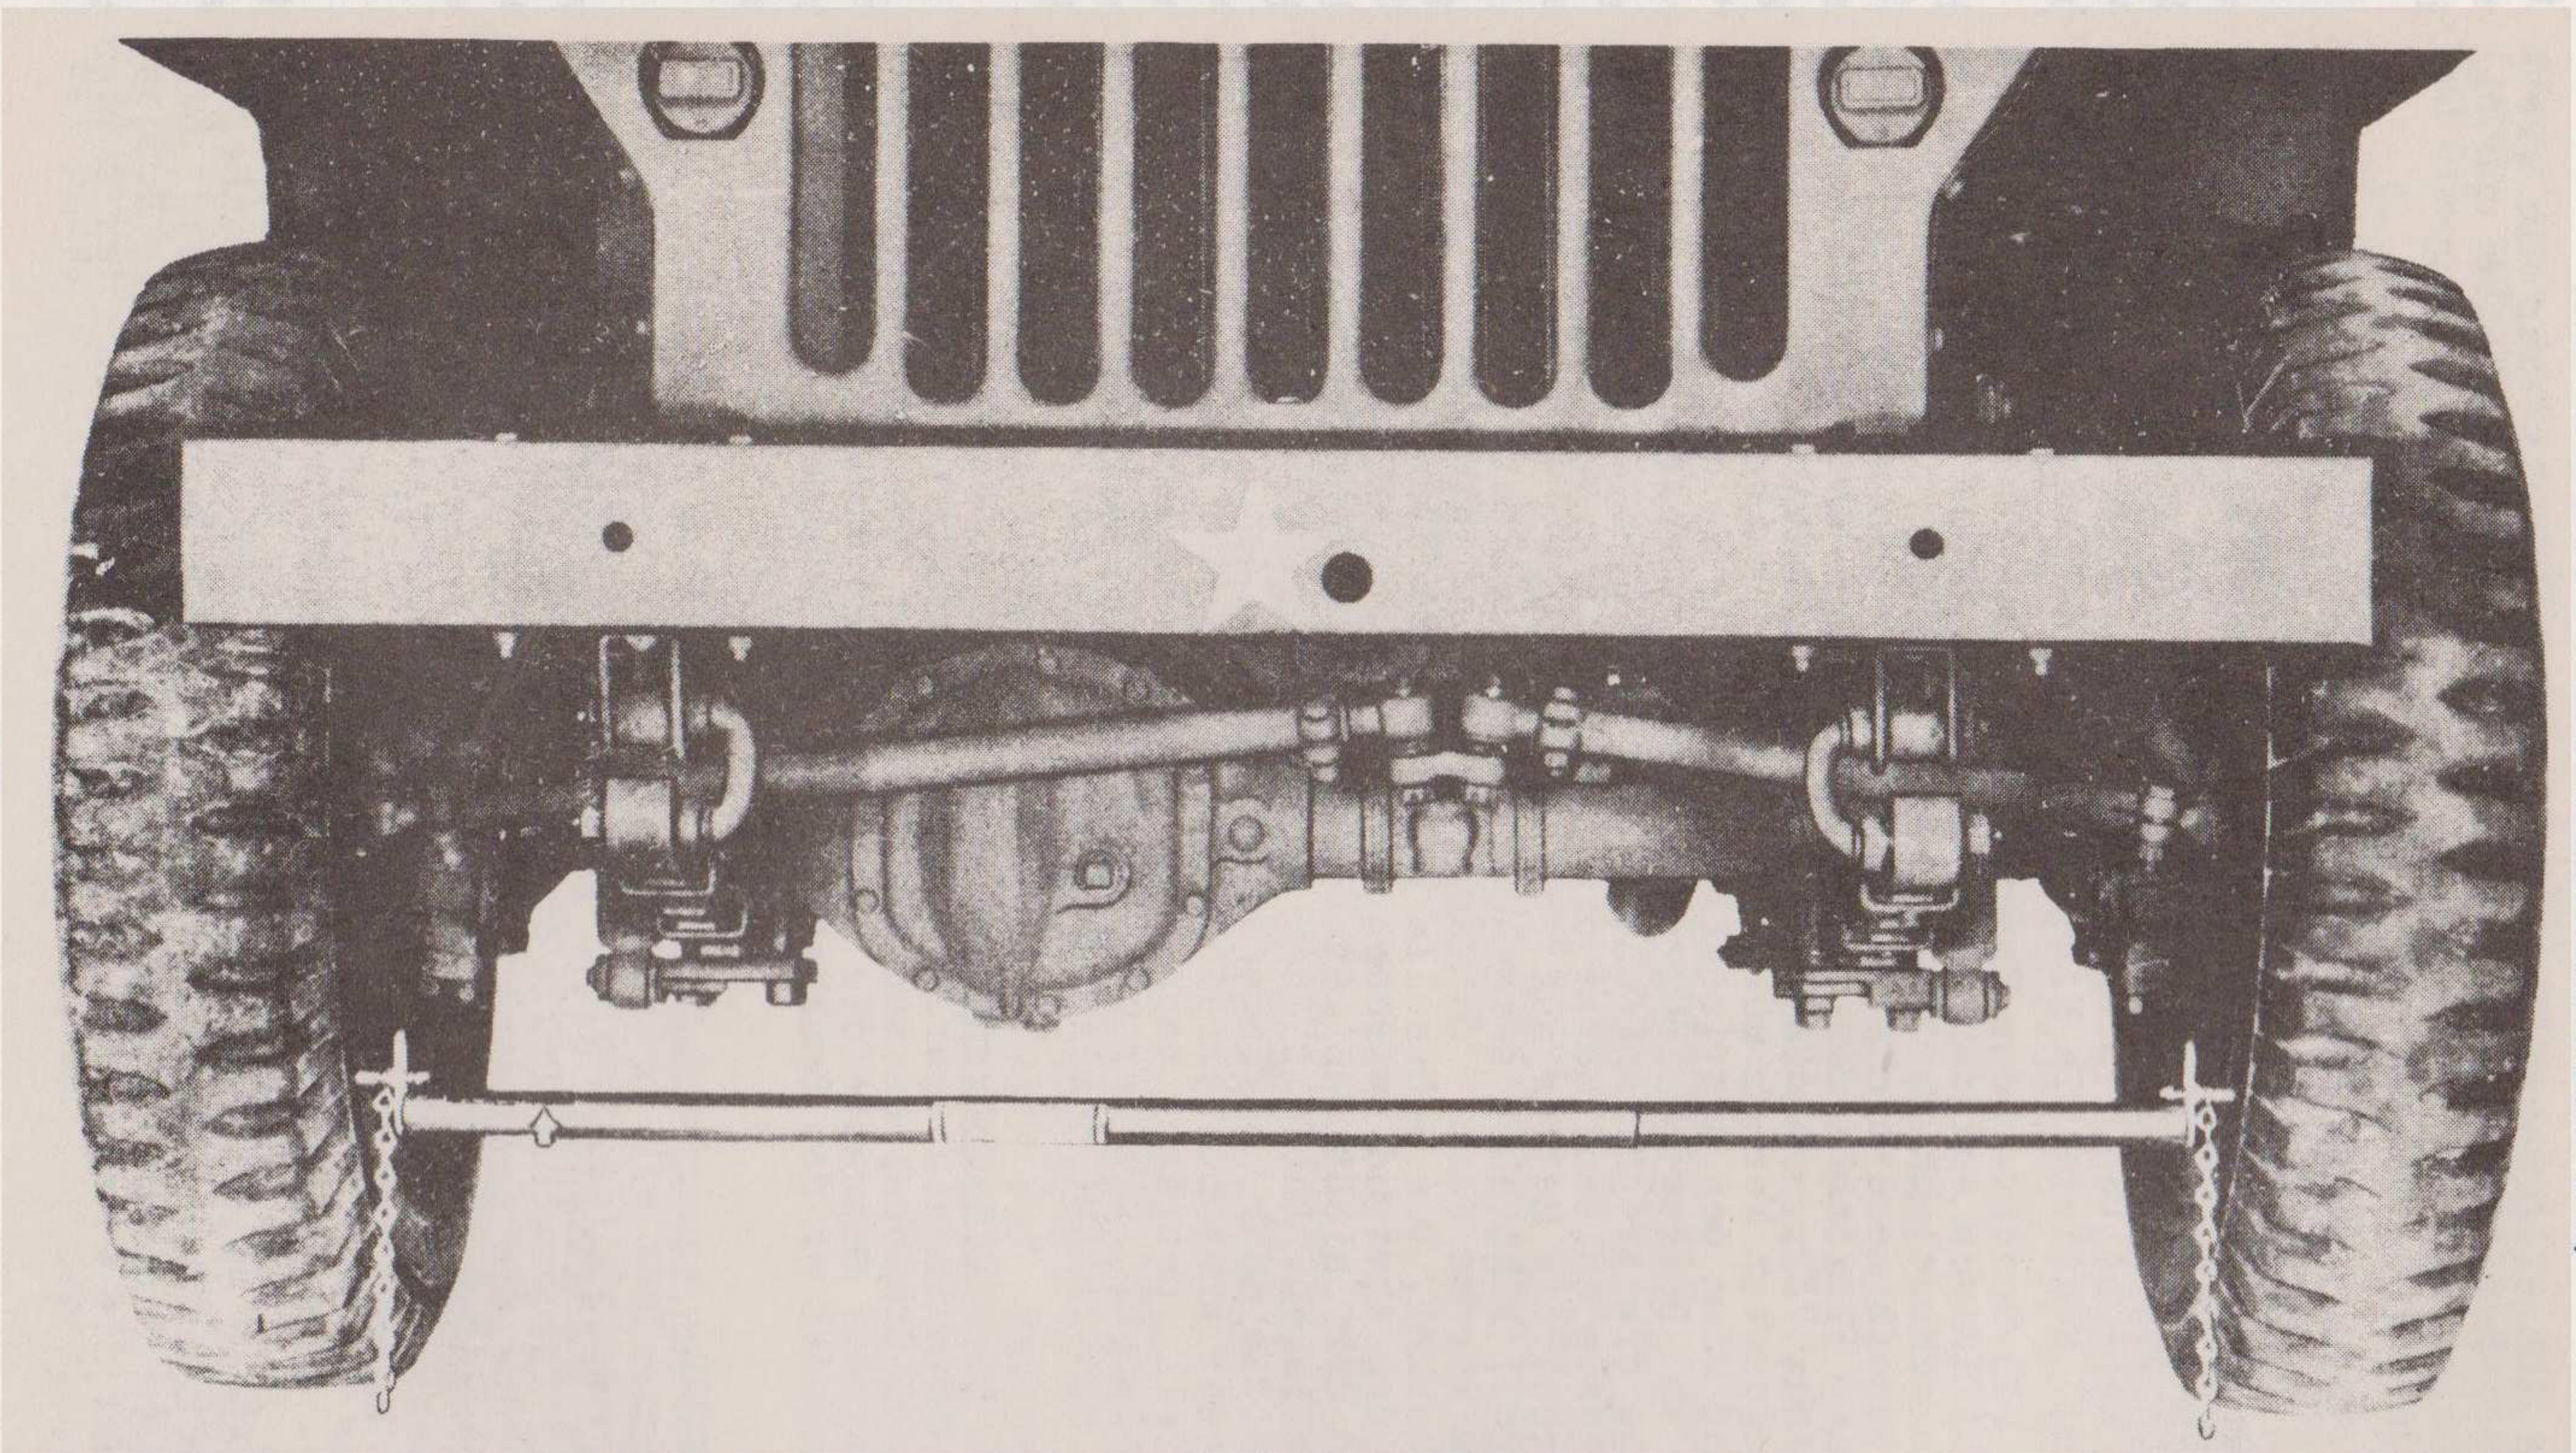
Adjusting Toe-in, Using Wheel Alining Gage 41-G-510
